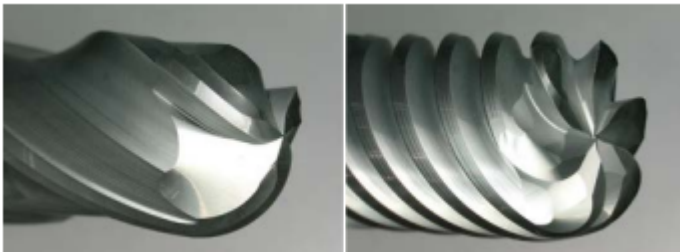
From left, OSG ball end mill AM-EBT R6 and radius end mill AM-CRE dia. 12 x R2
